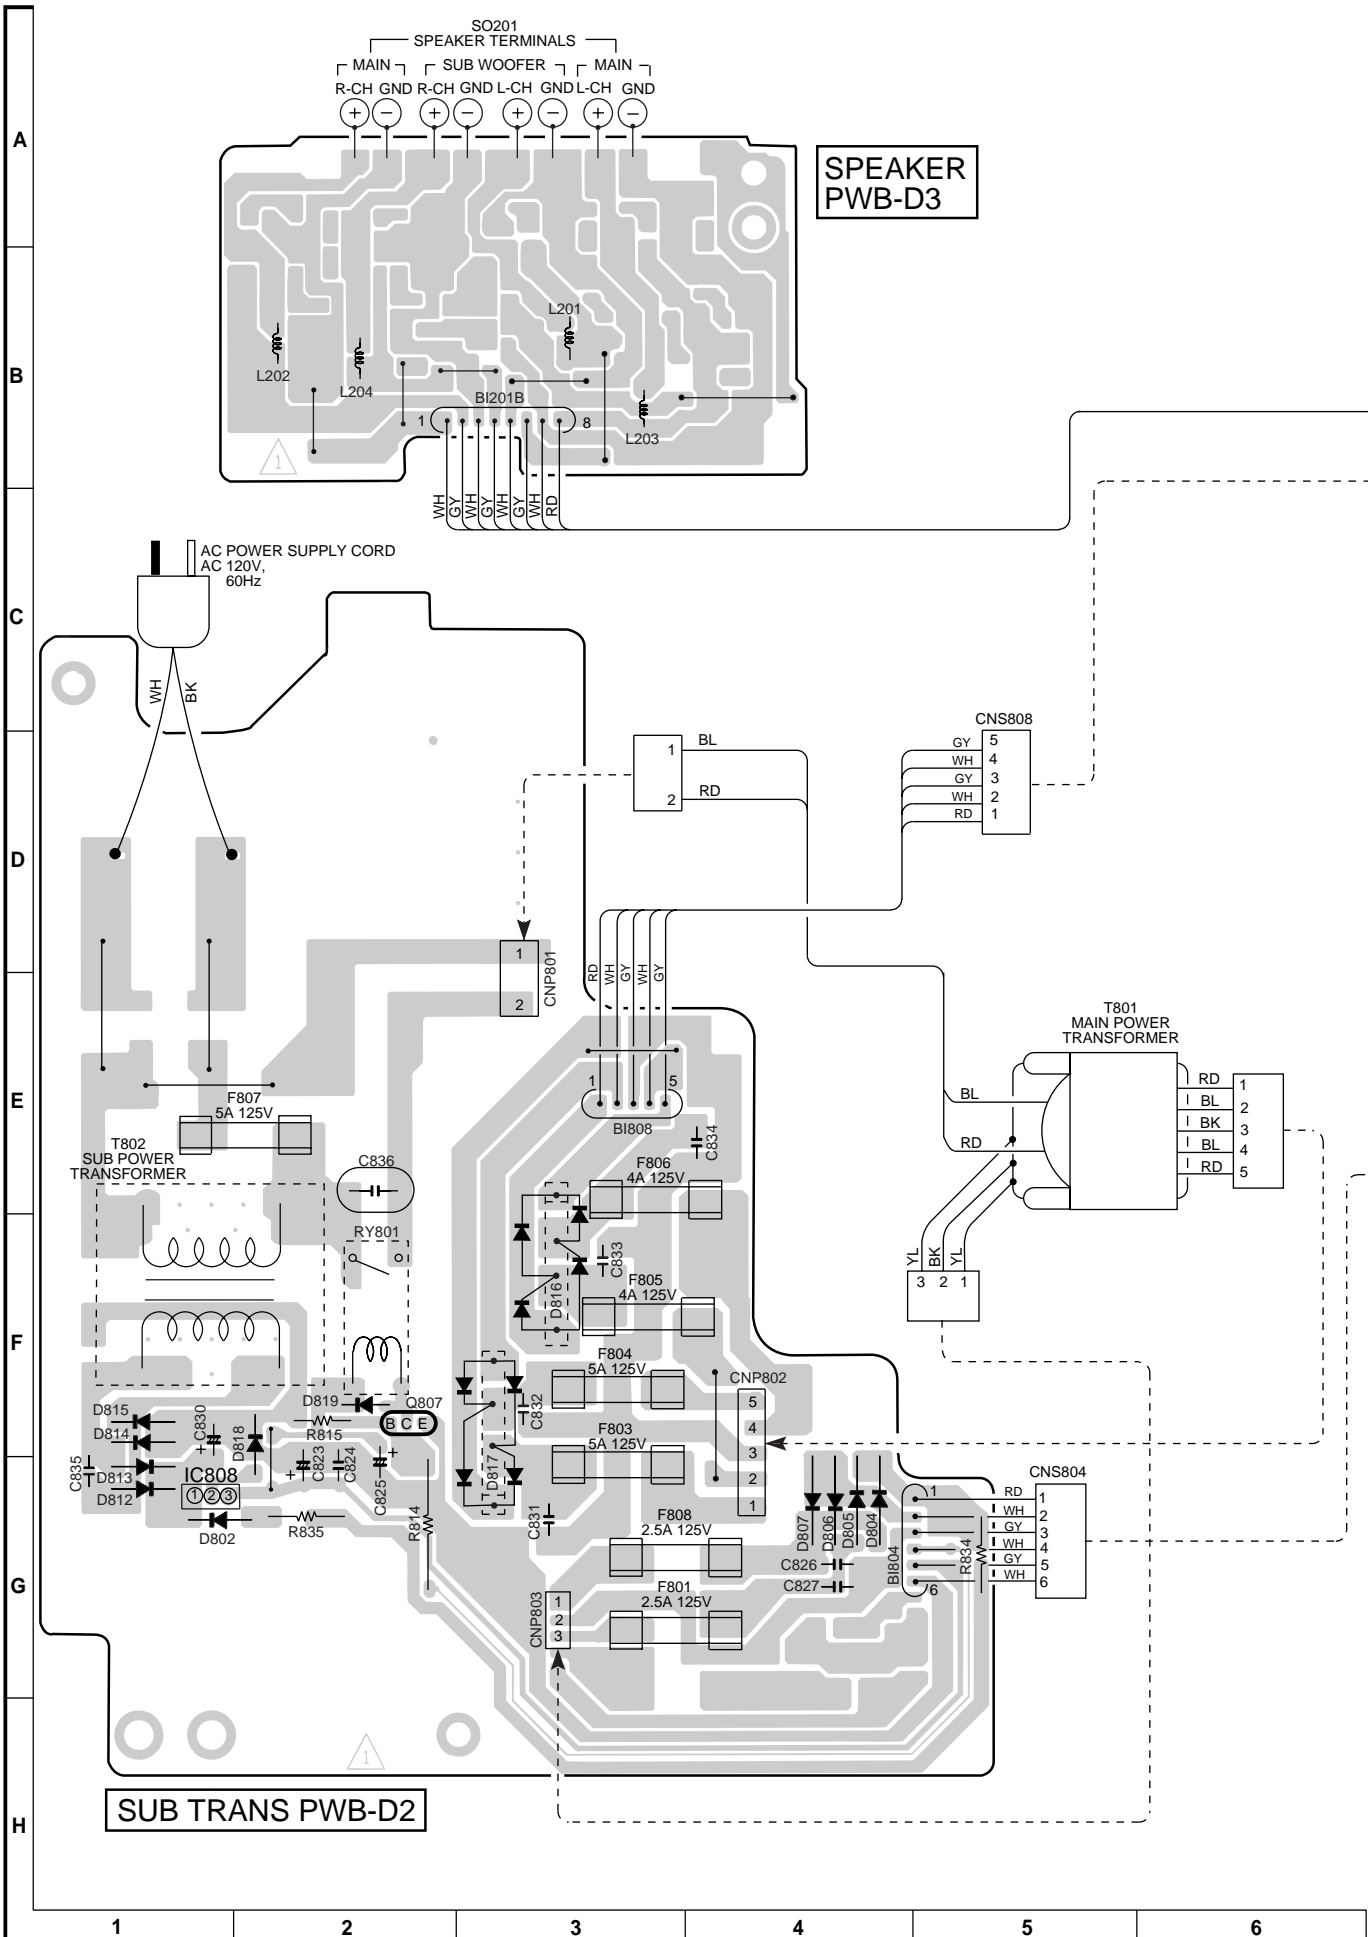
WIRING SIDE OF P.W.BOARD (8/9)
